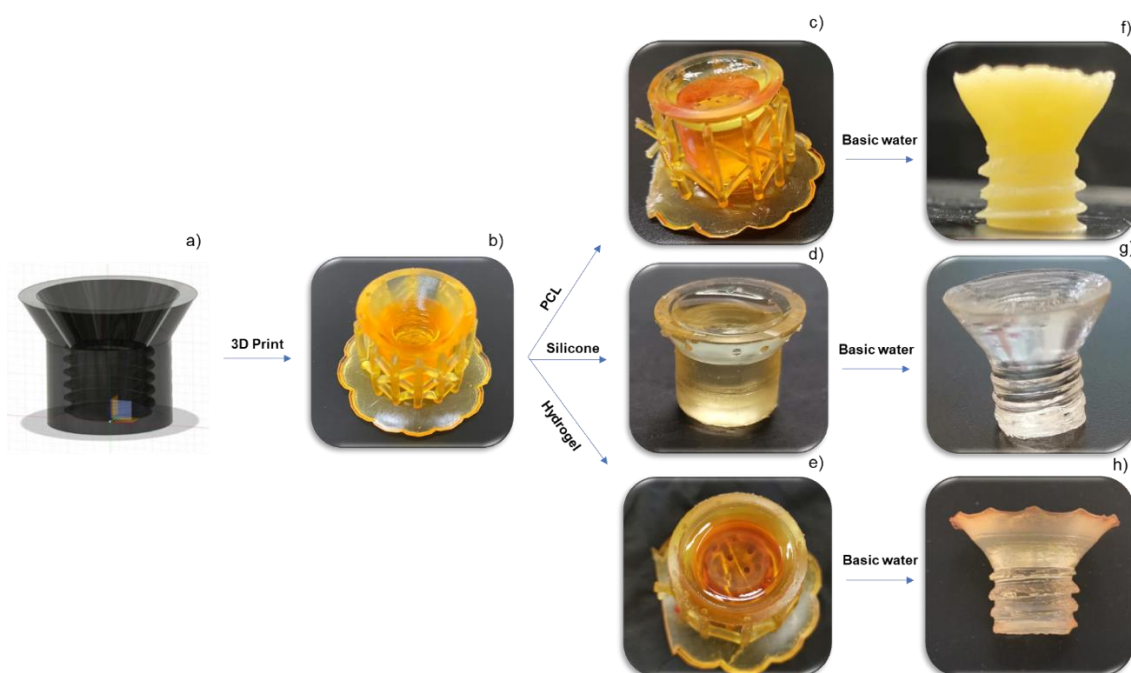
Scheme of the proof on concept to prepare PCL or silicone screws using the sacrificial molds described in this work. a) Digital design of the mold. b) Printed mold. c) Printed mold filled with the molten PCL (100 °C). d) Printed mold filled with the two components liquid Sylgard 184 (please note that in this case the print support columns have been removed). e) Printed mold filled with the VCL-based liquid resin. f) Final PCL screw. g) Final silicone screw. h) Final VCL-based hydrogel screw.
